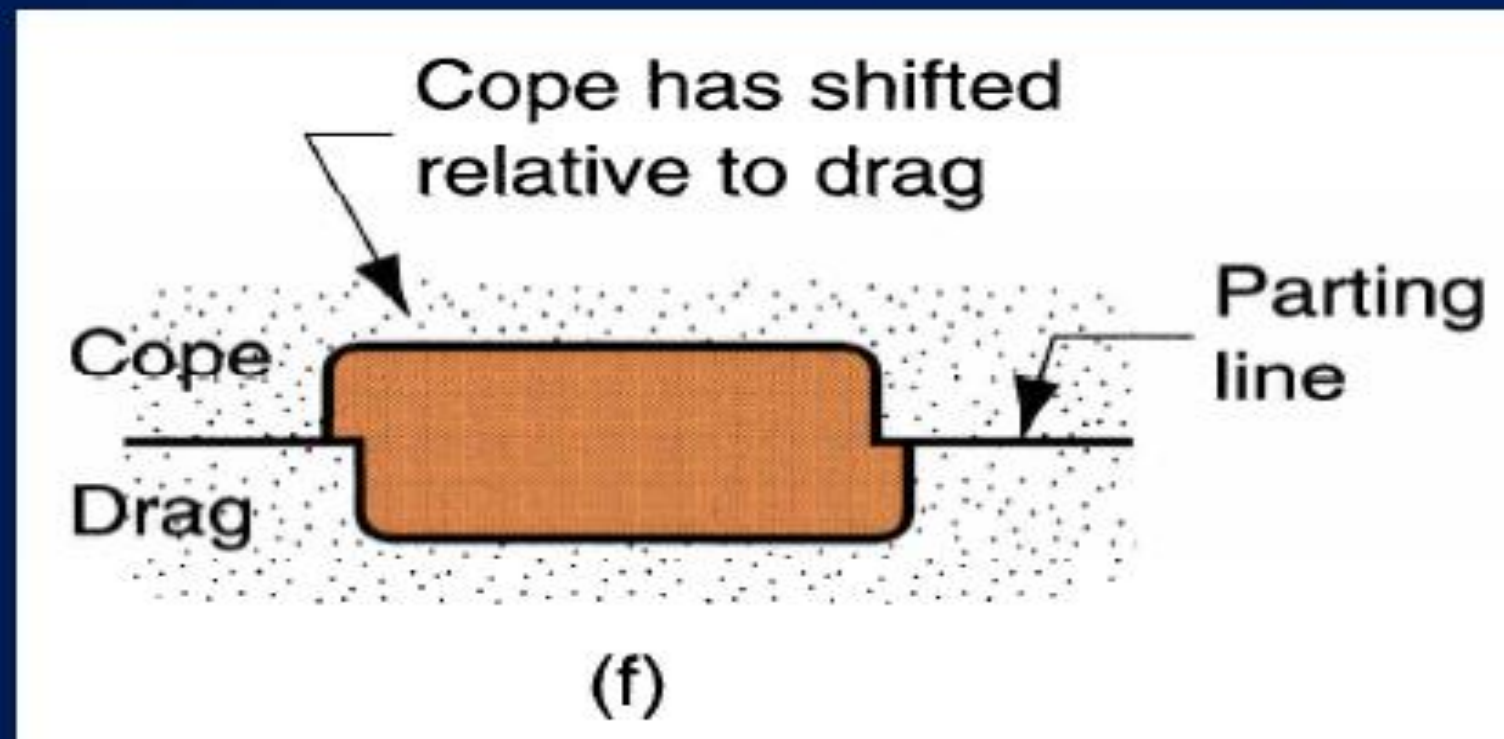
Common defects in sand castings: (f) mold shift
